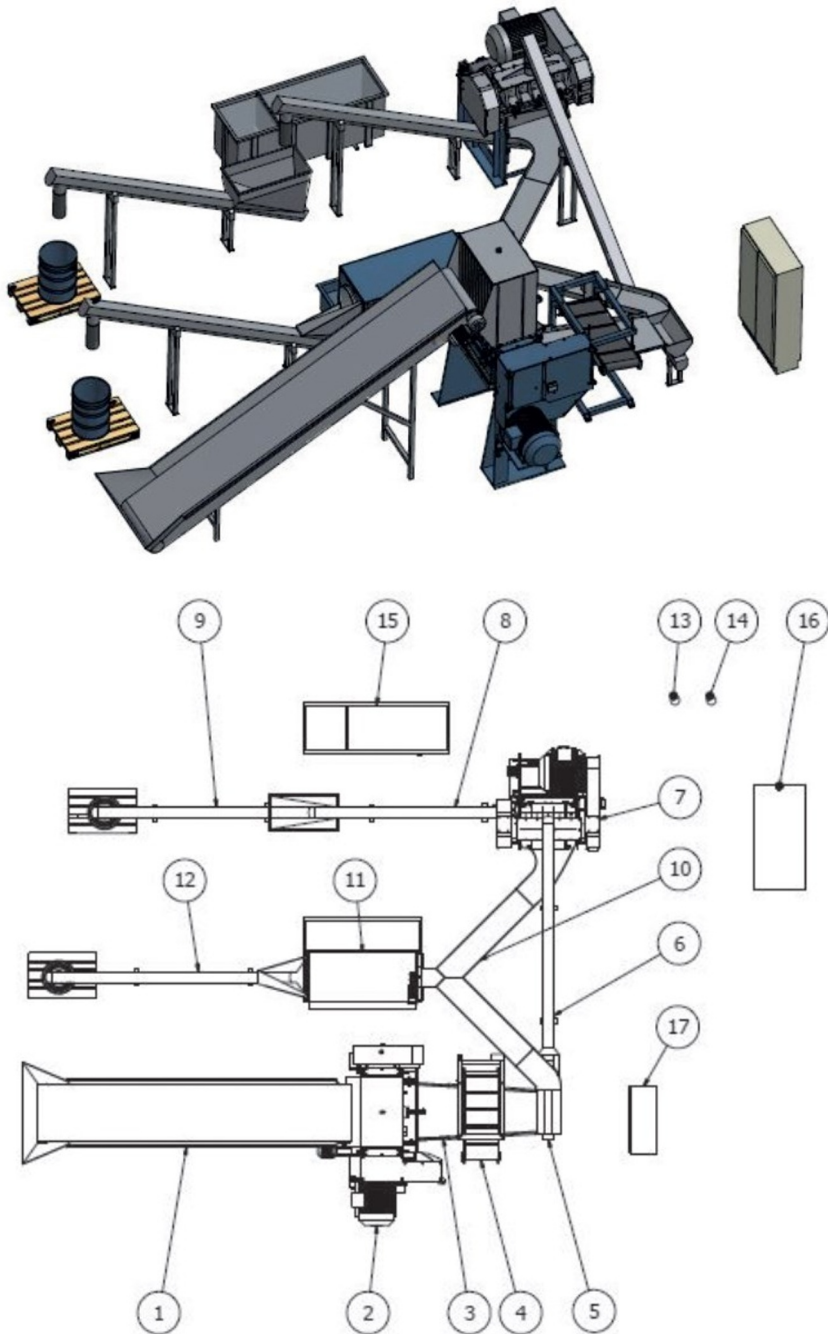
Layout Jelly Plant [7]. Elements: 1 – inlet conveyor, 2 – pre-granulator PG1200, 3 – outlet chute, 4 – overband magnet DM1850, 5 – screw conveyor, 6 – screw conveyor, 7 – fine granulator FG952, 8 – screw conveyor, 9 – wash unit, 10 – water conveyor channels, 11 – rotating filter (for plastic fraction), 12 – screw conveyor (plastic fraction), 13 – pipe system: steam, 14 – pipe system: water, 15 – water tank, 16 – steam generator, 17 – electrical power board.
